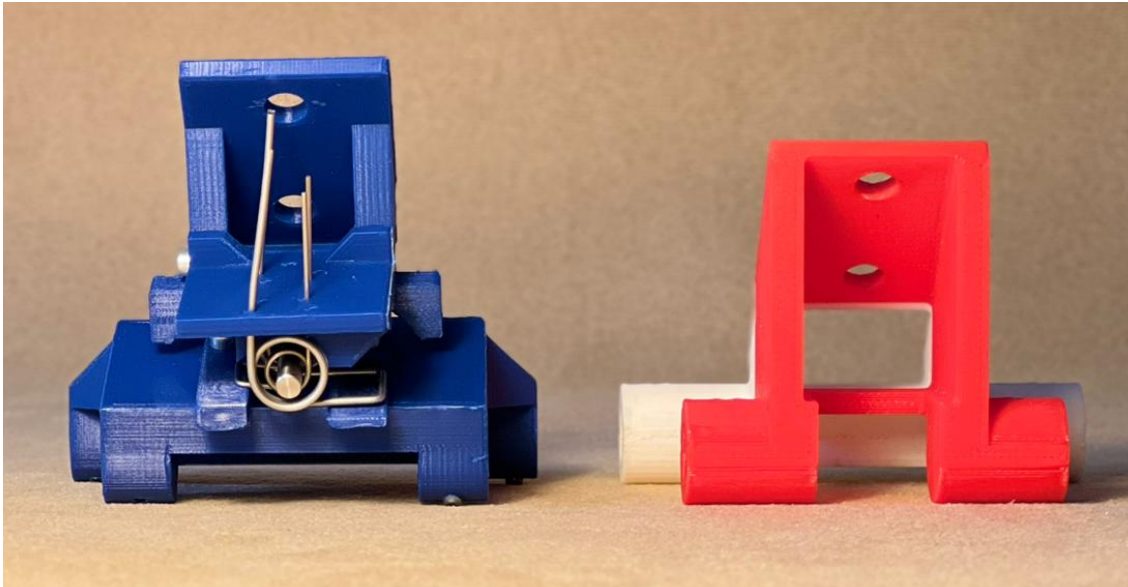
Front view (frontal plane) of the 3D printed re-designed base (blue) and the 3D printed original base (red and white) side by side.
